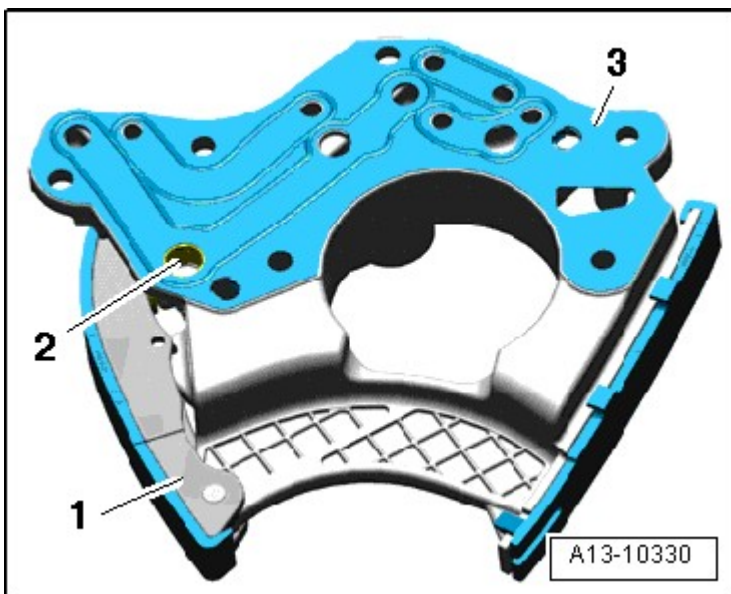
Identifying Chain Tensioner Oil Screen, Gasket & Chain Tensioner
